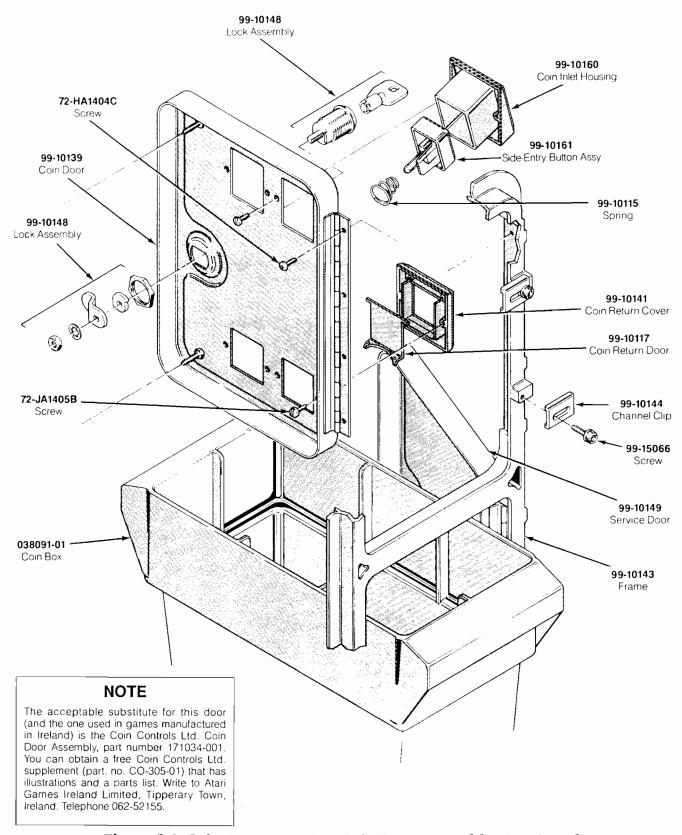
Coin Acceptors, Inc. Coin Door Assembly, Continued 171027-001 A
